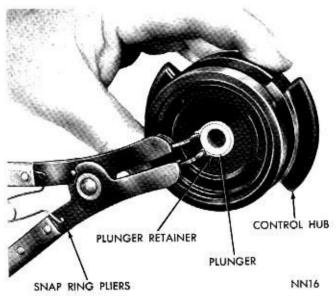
Removing the Control Hub from the Power Piston Assembly
